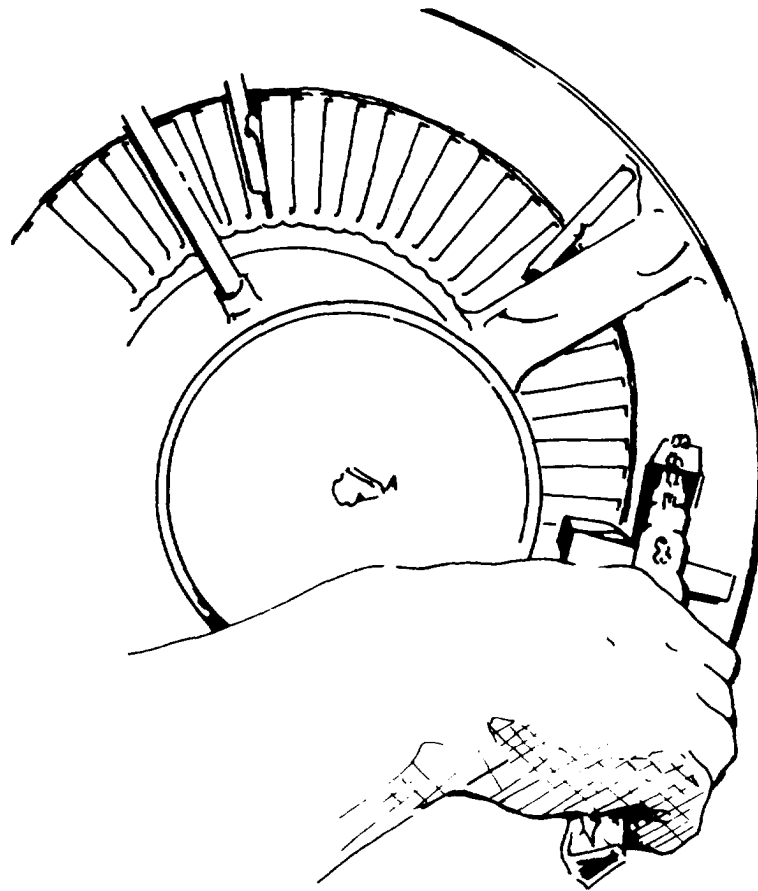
Installation of heater probes in engine (sheet 1 of 2).
